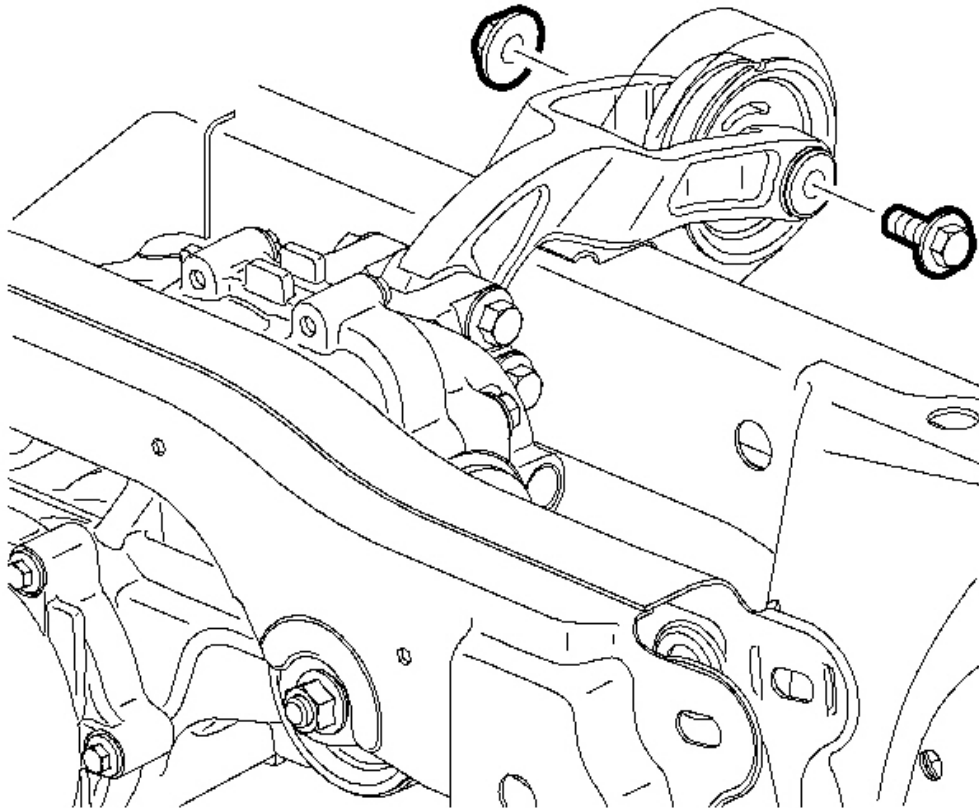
Removing/Installing RDM Rear Mounting Bracket
